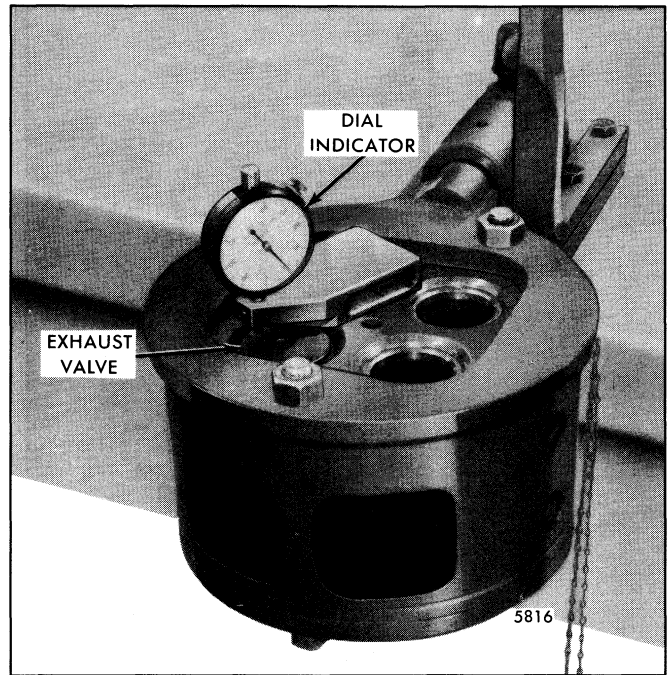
Relationship Between Exhaust Valve and Cylinder Head
